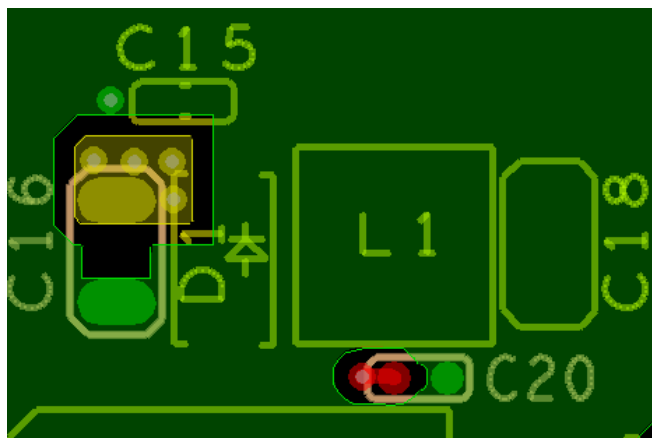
SWBST example layout. bottom layer components + top and bottom silkscreen
